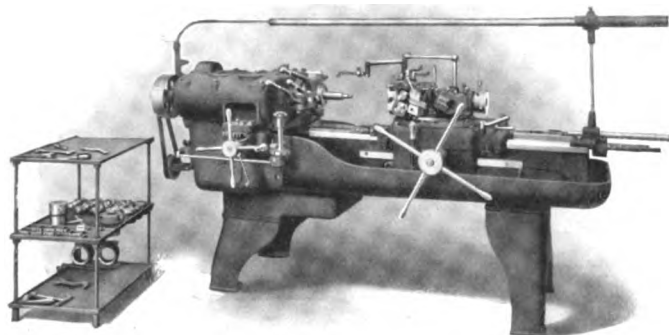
Single Spindle Hartness Flat Turret Lathe with Bar Equipment
